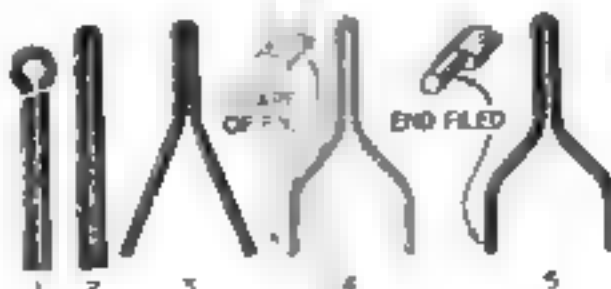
Steps in making a valve-grinding tool from a heavy split cotter key
